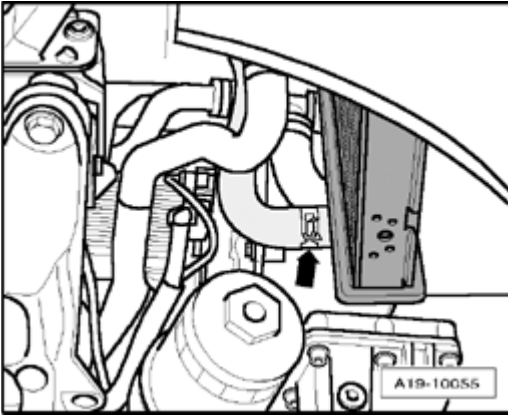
Auxiliary Cooler Lower Right Coolant Hose
